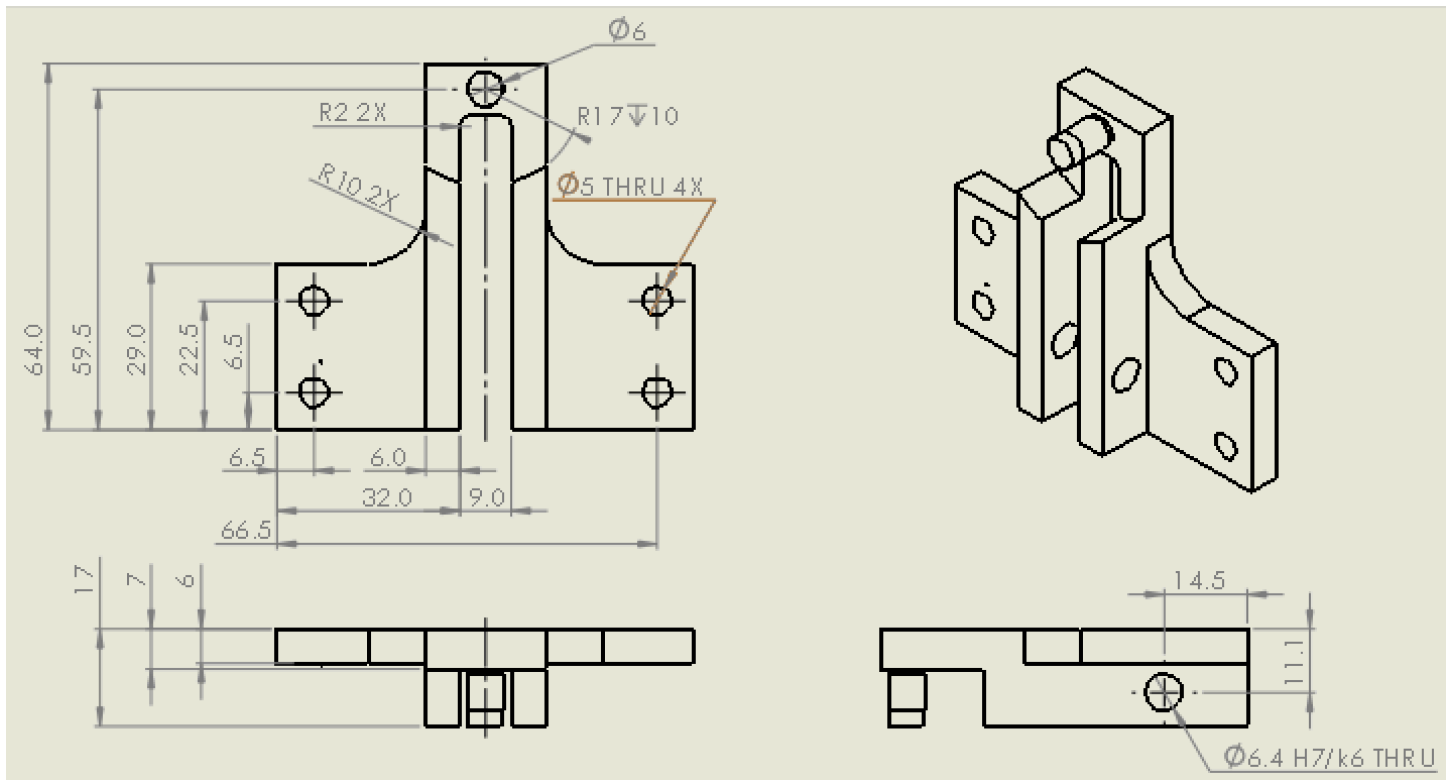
SNAPSHOT OF ENGINEERING DRAWING FOR CARRIAGE
